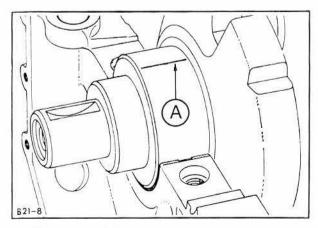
Location of Plastigage thread. A – Calibrated plastic thread.
